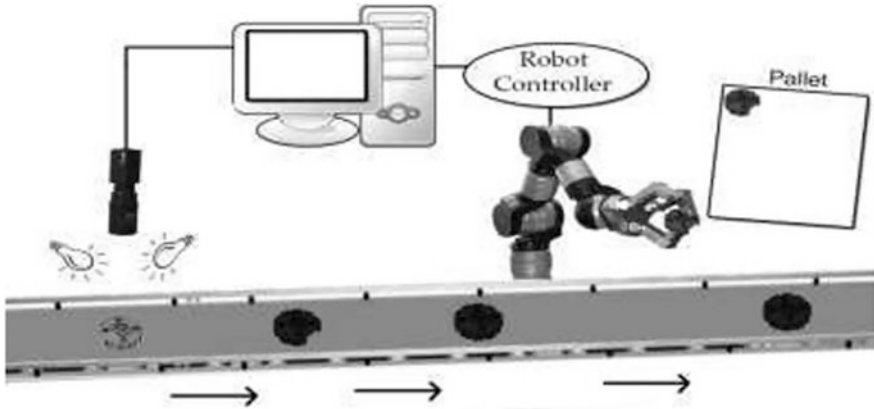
A schematic diagram for machine parts detection in model assembly line
